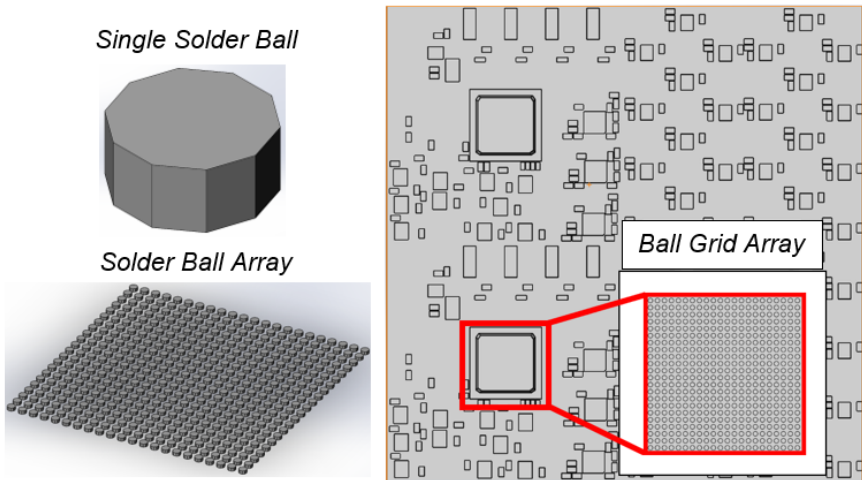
Example of BGA representation in CAD model geometry using SolidWorks and linear component pattern.
